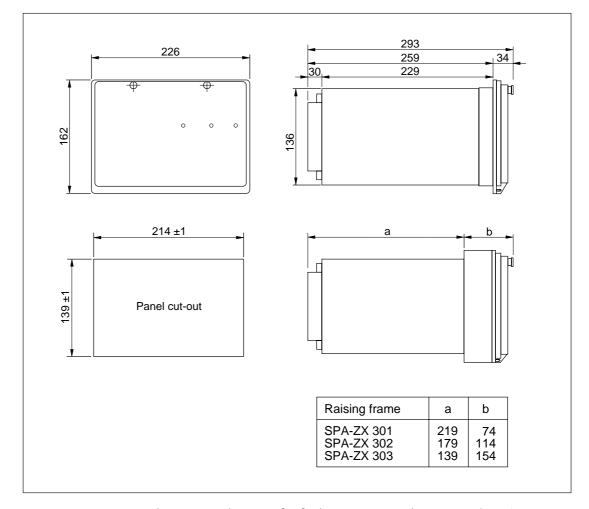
Dimension and mounting drawings for feeder protection relay SPAA 341 C /E351.
